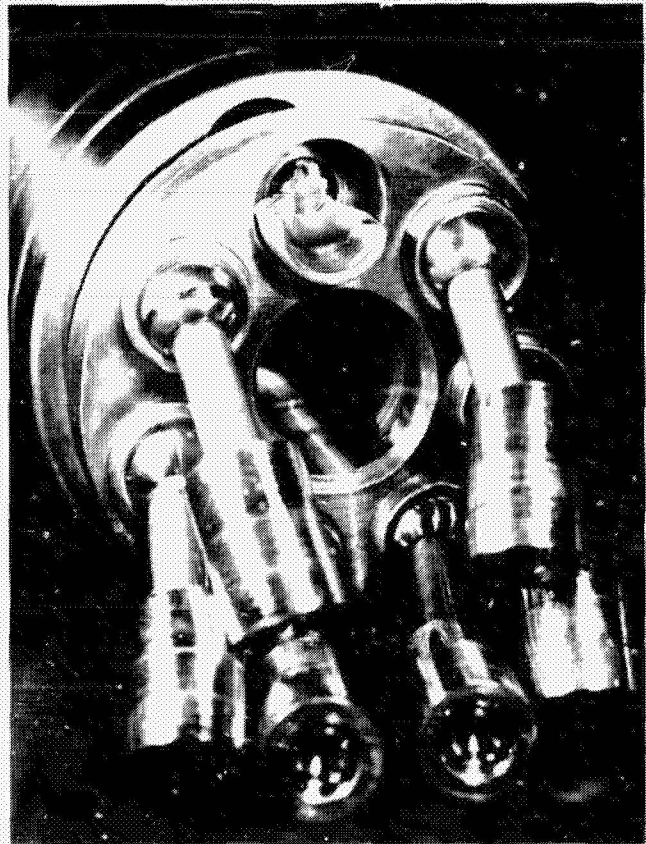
64-m antenna drive motor shaft and piston assembly
